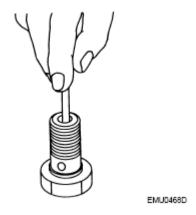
Pressing Check Valve Using Plastic Stick Courtesy of NISSAN MOTOR CO., U.S.A.
